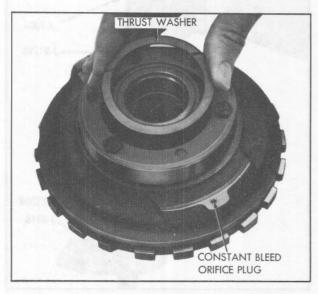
Removing Center Support to Reaction Carrier Thrust Washer
